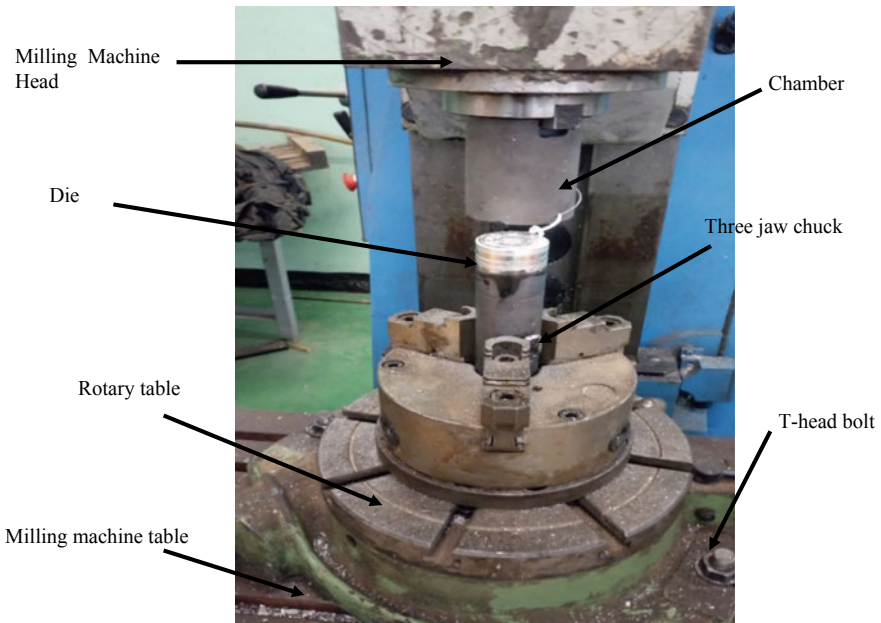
Setup of friction stir back extrusion process on milling machine
